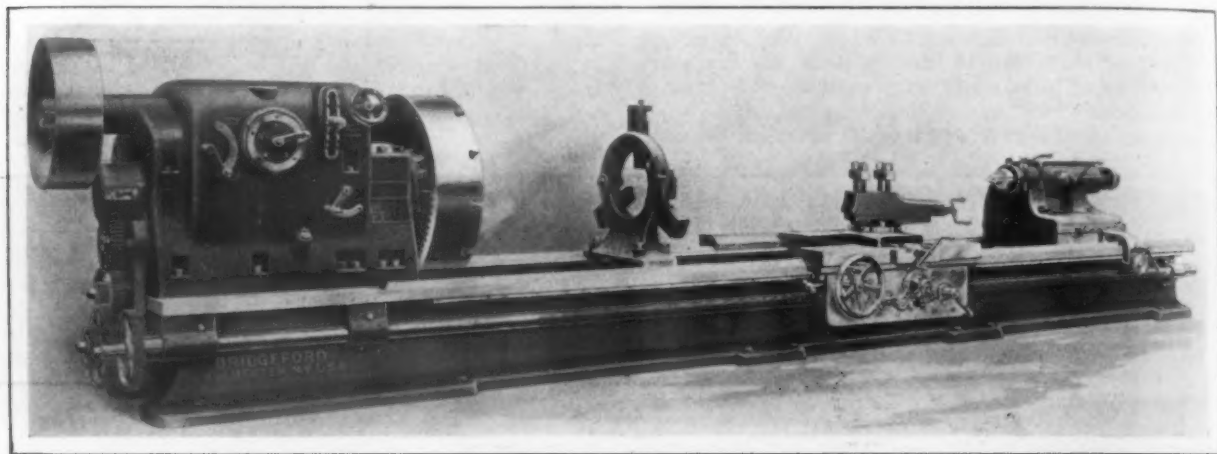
A 48-In. Lathe with a Patent Geared Head
